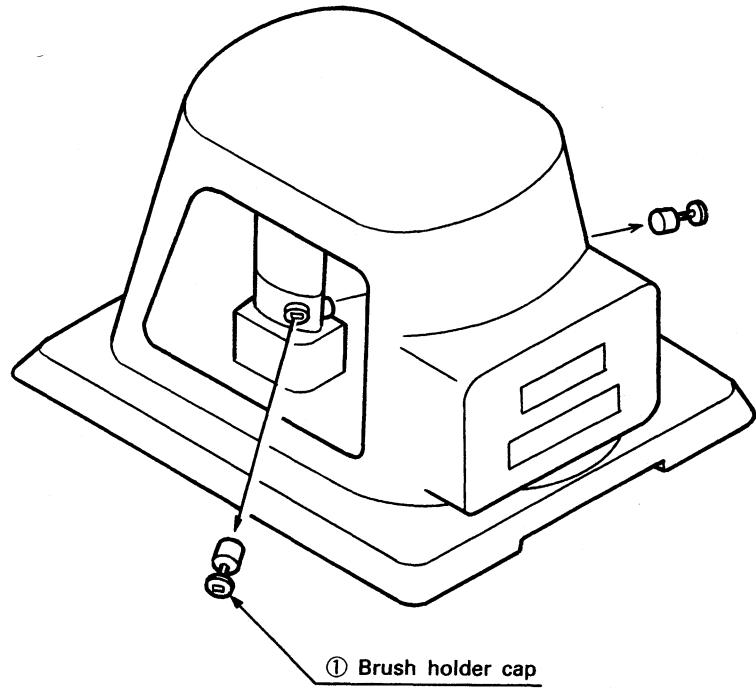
Checking and Changing the Waist Drive Motor Brushes
